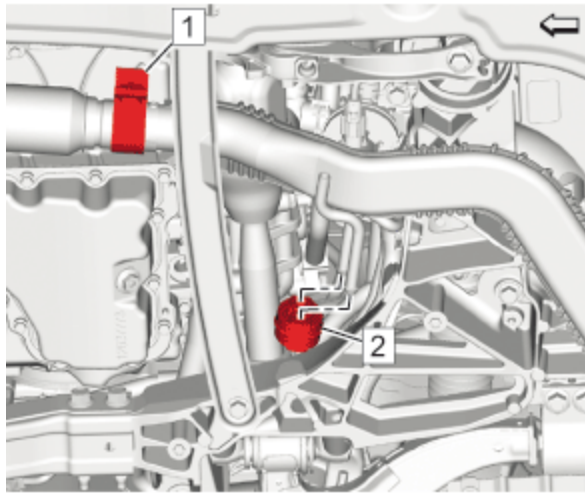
Exhaust Pipe Clamp And Exhaust Hanger Insulator
